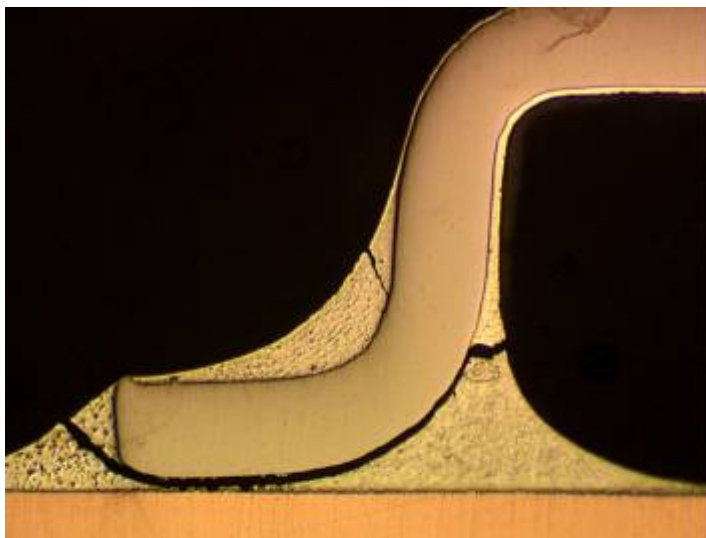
cross section, SN63, U16, left lead solder crack, 100xa
